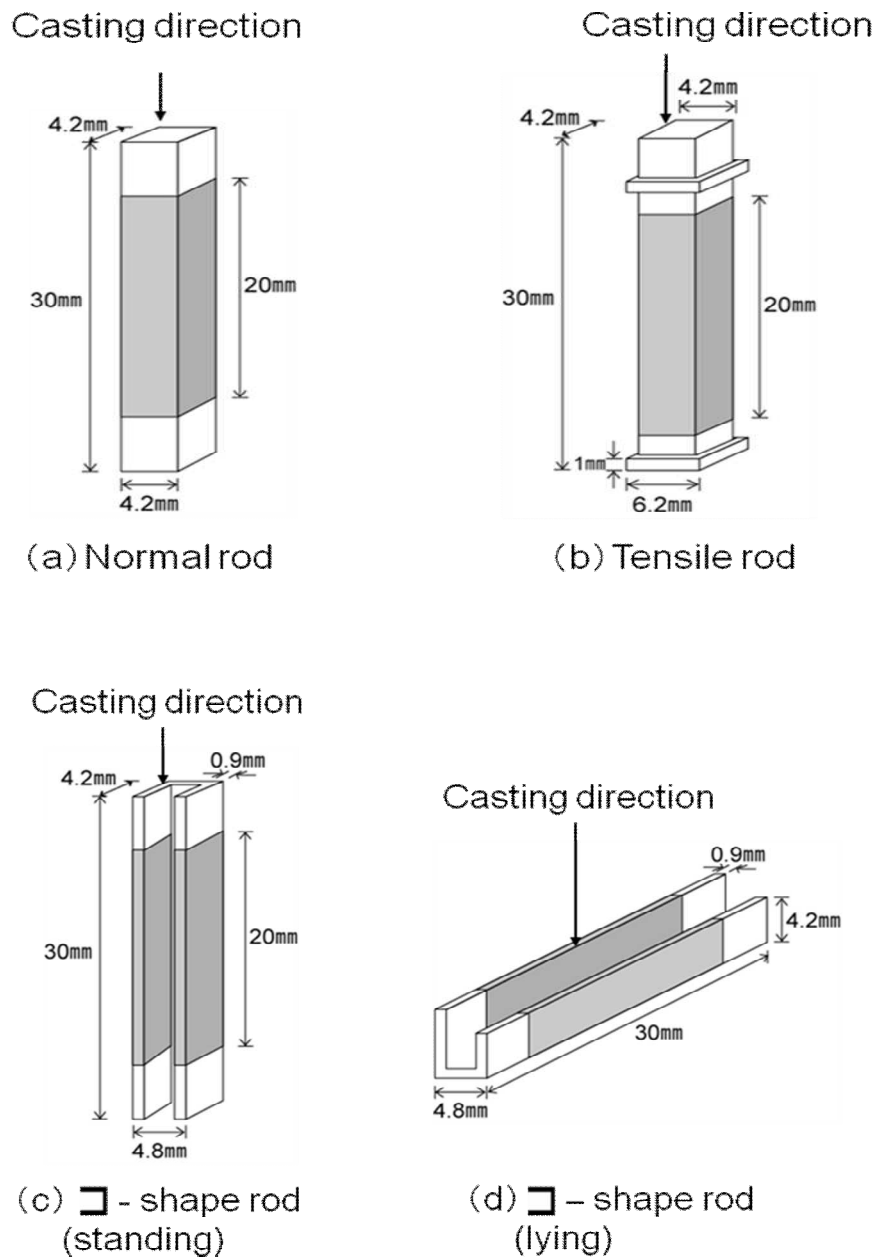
Shape and dimensions of rod samples casted by iron molds.
